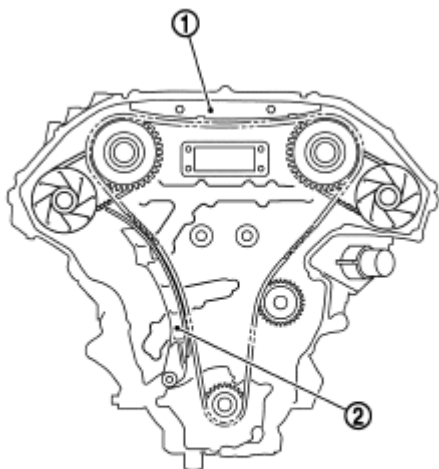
Identifying Internal Chain Guide And Slack Guide
